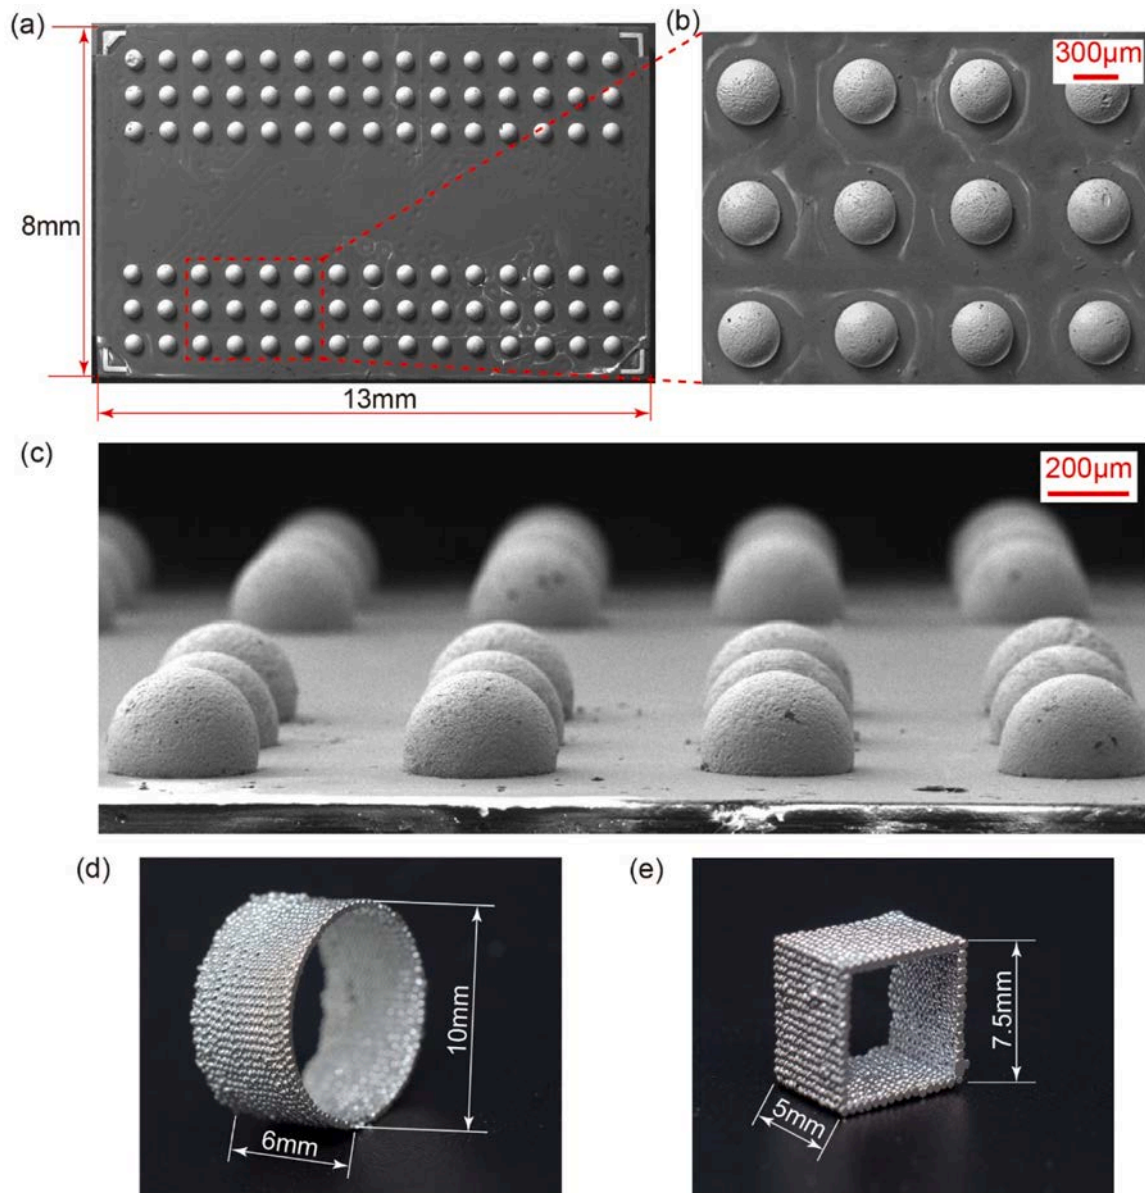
(a) A memory chip with solder balls printed by metal droplets. (b) A close-up view of (a). (c) A SEM front view of (a). (d) A cylindrical and (e) a square thin-wall tube printed by metal droplets under shielding gas.
